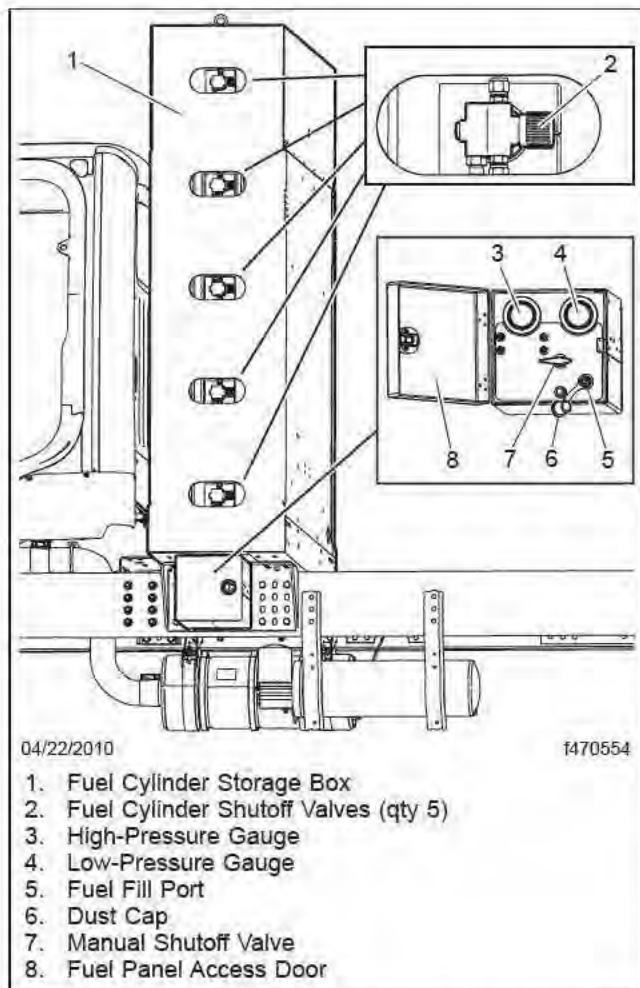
, CNG Fuel Cylinder Storage Box (5-cylinder system shown)
